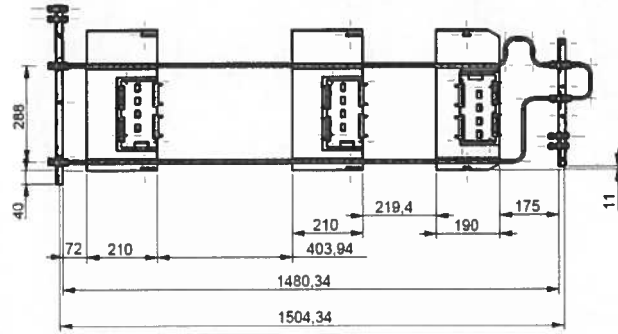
, The Cu cooling assembly for RE4/2 with position of FEBs
